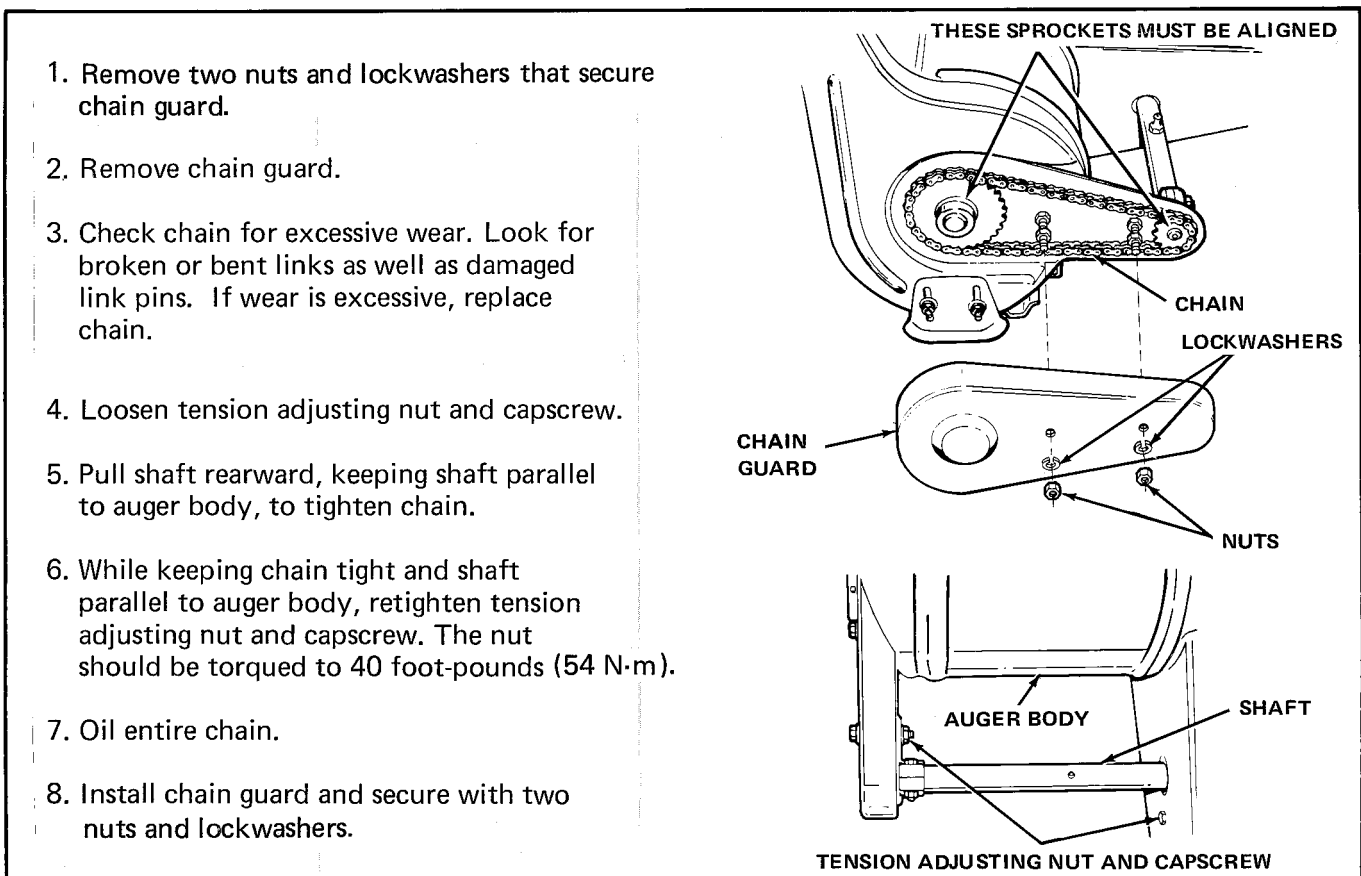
Inspect, Lubricate, and Adjust Drive Chain (Yearly Care)
